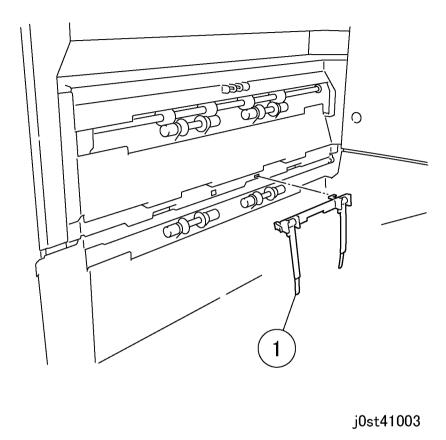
Removing the Paper Weight Assembly (j0st41003)
